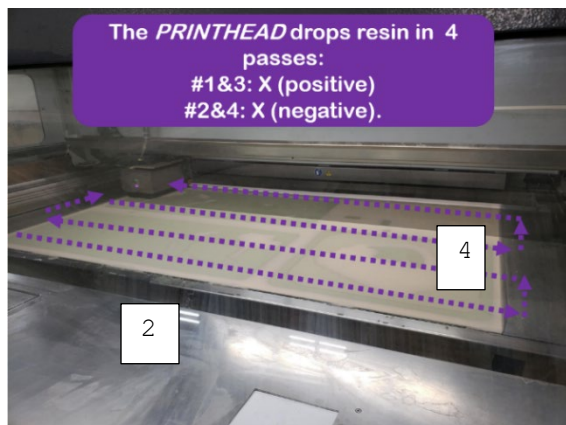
The ExOne S-Max Pro 3D sand printer build box.
